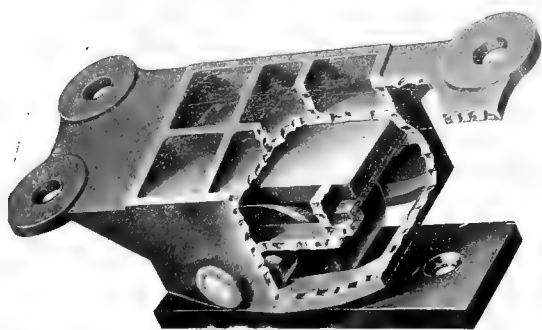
Norwood Roller Side Bearing. T. H. Symington Company.
